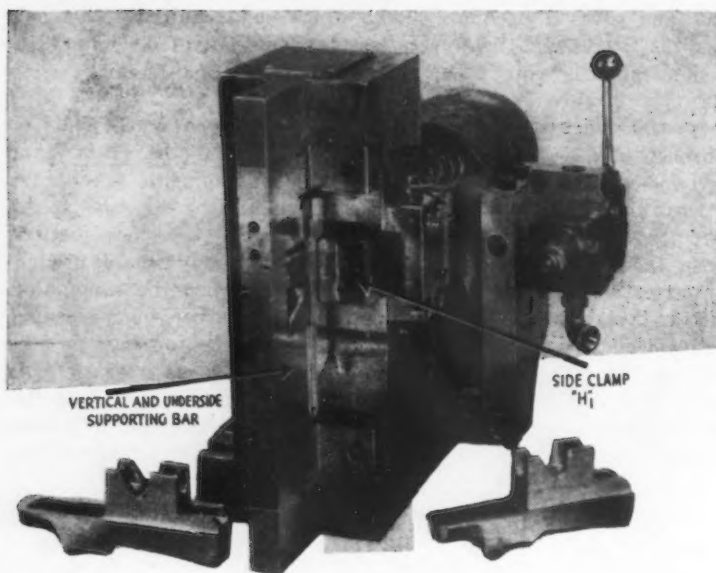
On the same table on which the fixture shown in Fig. 5 is mounted is this second fixture for performing Oper. 13A, rough broaching both sides of the magazine legs.
